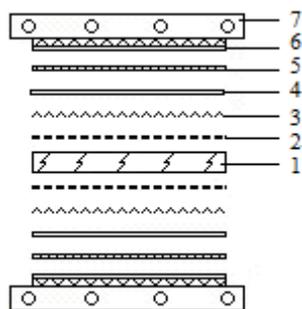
Putting the package between the platens of the press: Chipboard plated on both sides with aluminum foil: 1-chipboard; 2-barrier film; 3-adhesive film; 4-aluminum foil; 5-bright finished sheets; 6-compensation cushions and protection plate; 7-platens.
